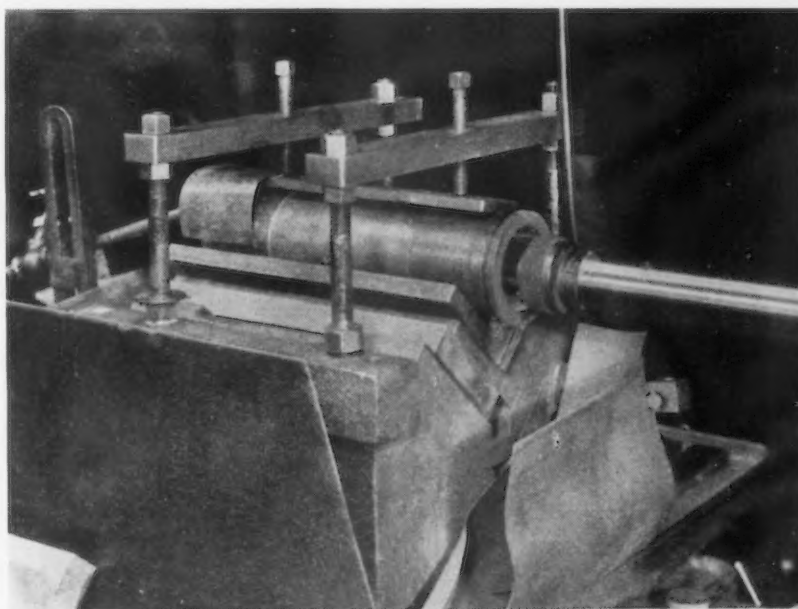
Internal grinding an aluminum bronze bushing used in an old style automatic.
